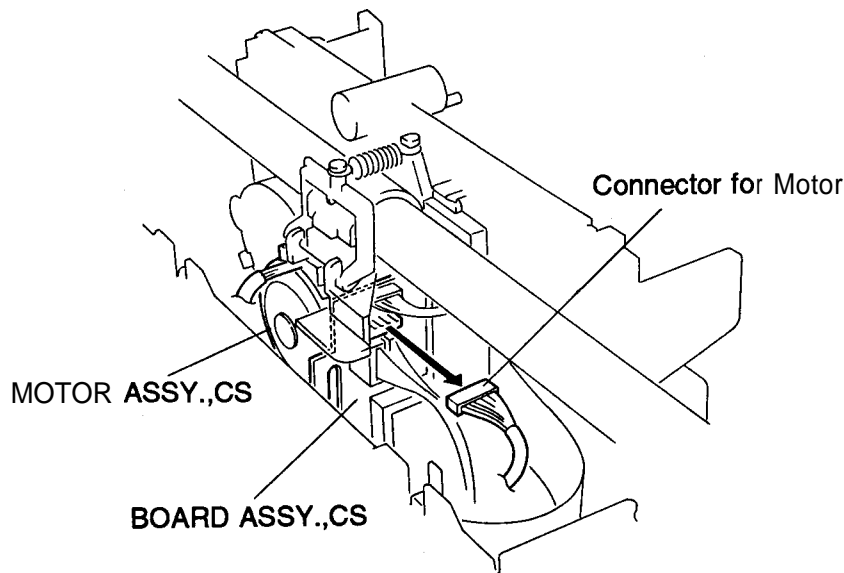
Removing the Connector of MOTOR ASSY.,CS
